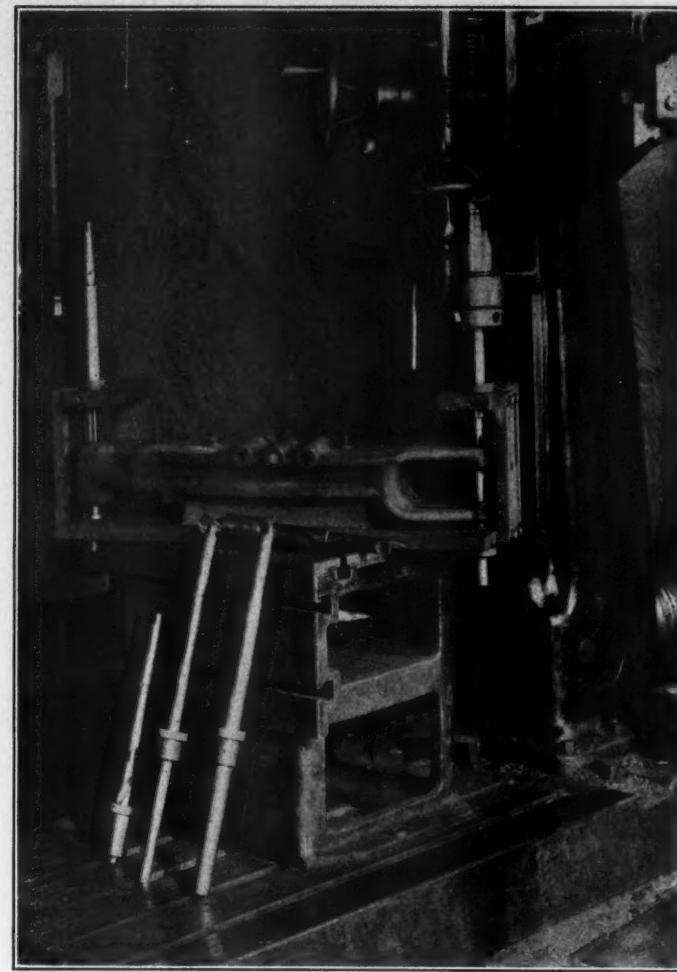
BORING JIG FOR ROCKER ARMS.
